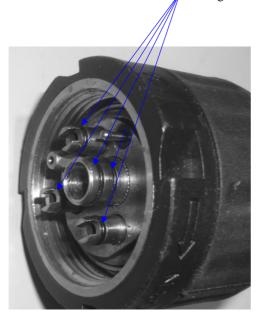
Fig.A (d) Applying grease to O ring of attached of water cooling torch
